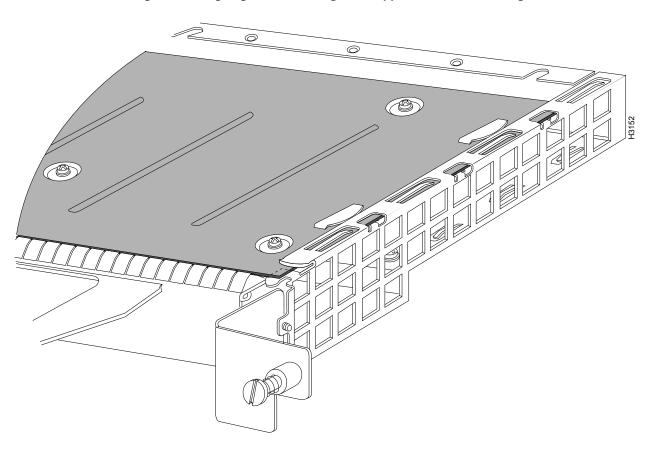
Aligning the Carrier Edge with Upper and Lower Slot Edges, Partial View
